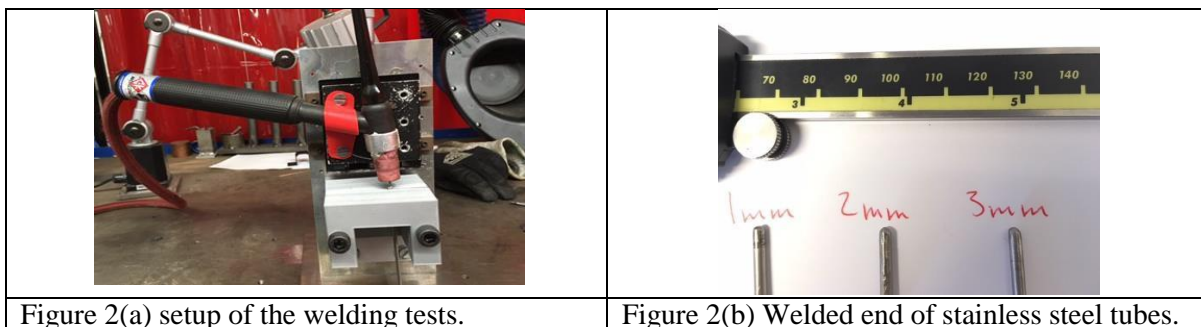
shows the welding setup (a) and some welded samples (b). The welding apparatus is able to control the height and position of the TIG through newly designed frame. The TIG welding torch is fixed with the height adjustable block unit. A tungsten electrode is used and Argon gas is flow through the torch; TIG Welding machine with a Rectifier (made by FRONIUS) covers a current range 10-180 A and voltage up to 230V, depending on the current setting has been selected. Ar gas is supplied to the welding torch with a particular flowrate, so that an inert atmosphere formed and stable arc created for welding. A fan is placed behind the welding apparatus to draw air from the workpiece prior to the weld discharge, to prevent oxidation during and after the solidification phase. Figure 2(b) shows some typical welded tips of different tube diameters. A Brukker GTK surface texture system was used to measure Surface Roughness of the welded tip for all specimens. These readings will help determine the change in the surface condition, including potential oxidation. A design of experiments (DOE) has been used to produce samples under different parameters including Electrode Workpiece distance (mm), Argon Gas Flowrate (l/min), Voltage (V) and Current (A).
